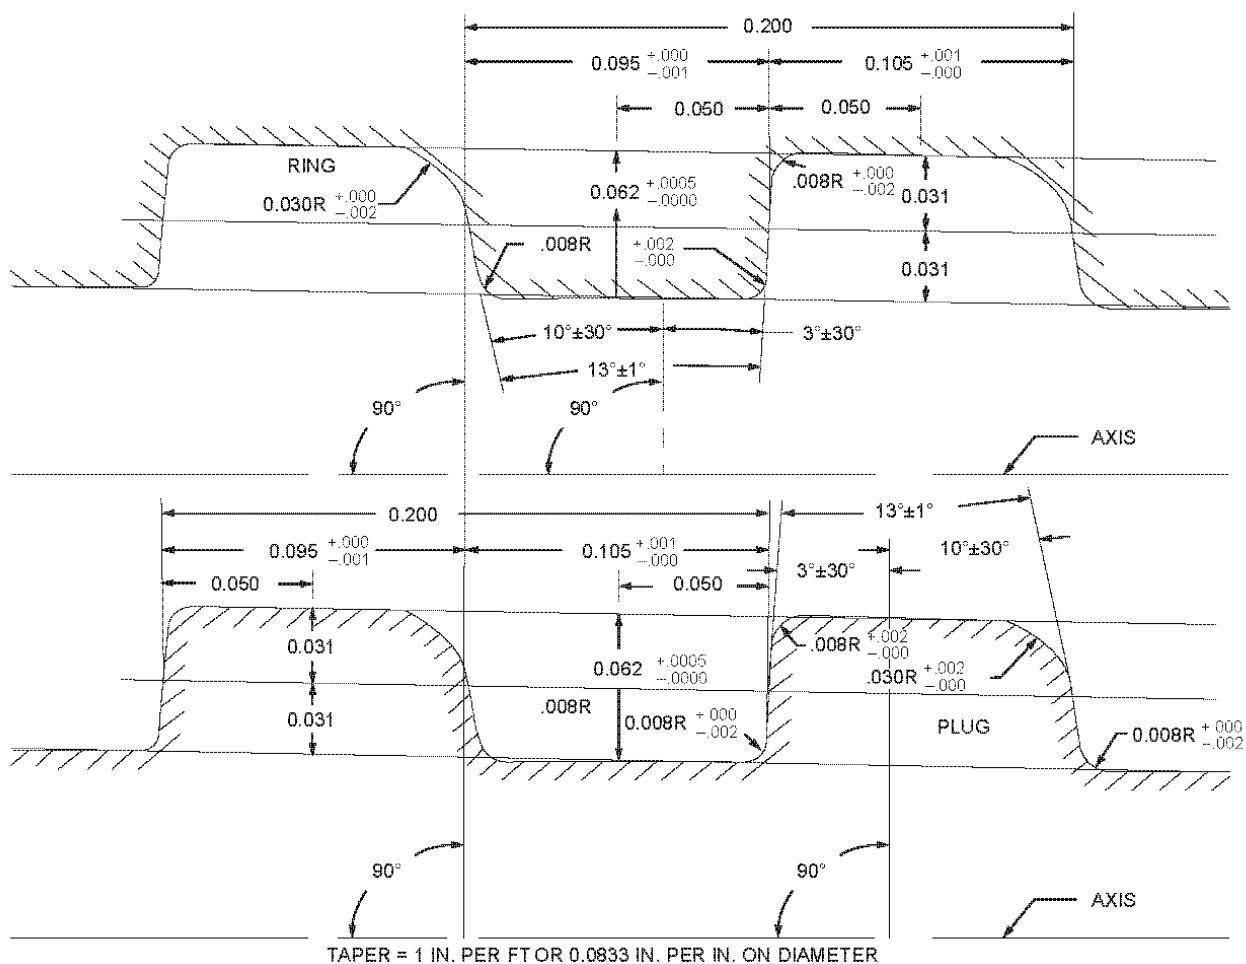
Gauge Thread Form for Line Pipe and Round Thread Casing and Tubing
